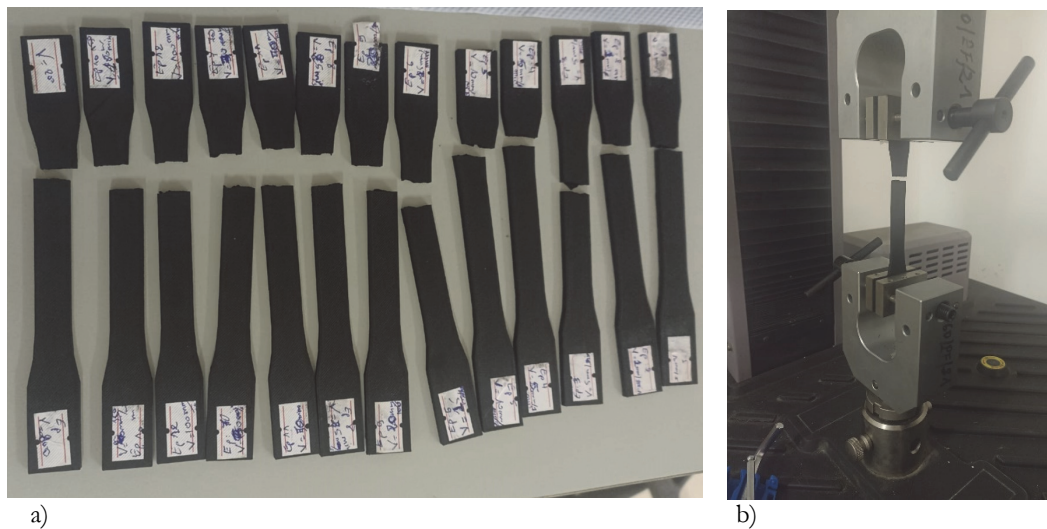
a) A set of fractured printed samples; b) A sample under tensile test loading.
